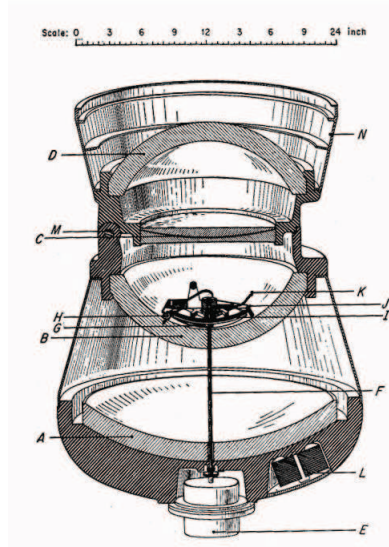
Cross sectional view of Super-Schmidt camera. (A) Main mirror (B) Rear glass shell (C) Correcting plate (D) Front glass shell (E) Shutter motor (F) Shutter shaft (G) Rotating shutter (H) Focusing post (I) Film holder (J) Film holder hinge (K) Vacuum line (L) Counter weight (M) Hinge for opening camera (N) Dew cap [4].
